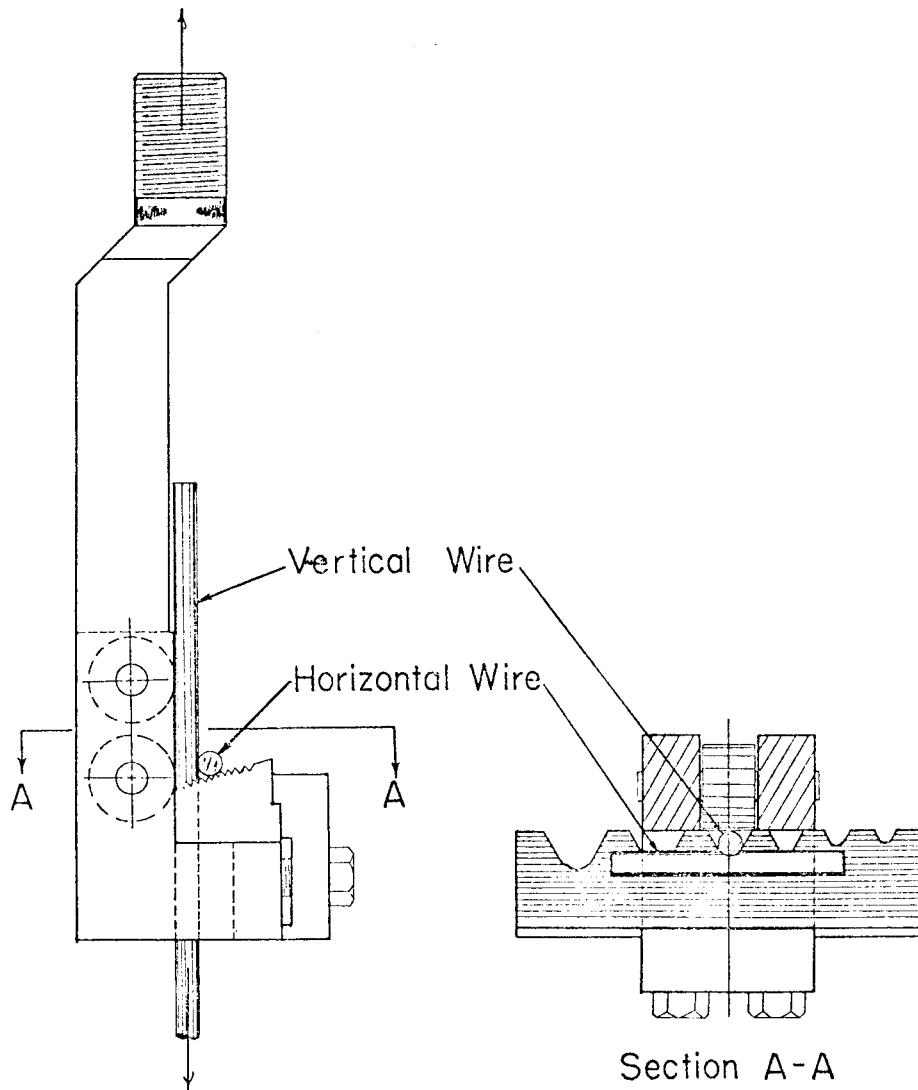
Welded Wire Fabric Weld Tester
